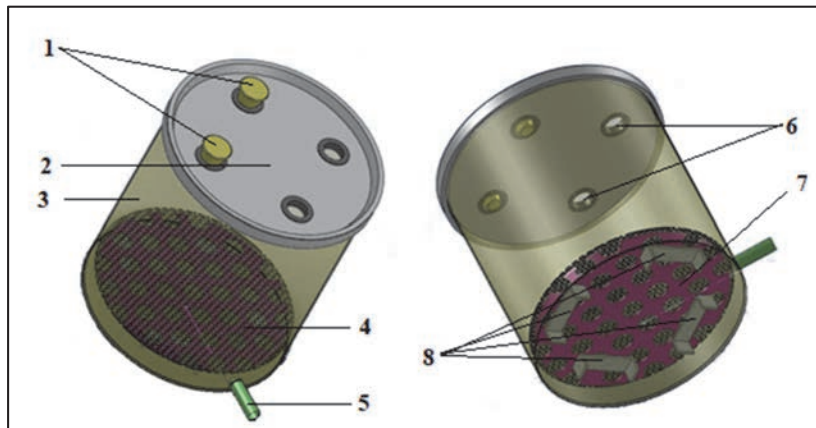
Composting bioreactor - Isometric view (drawing made in SolidWorks): 1 - Inlet caps; 2 – Removable top; 3 - Bioreactor body; 4, 7, 8 - Composting layout system (mash, plastic grid, support system); 5 – Leachate leakage tube; 6 – Inlet.
